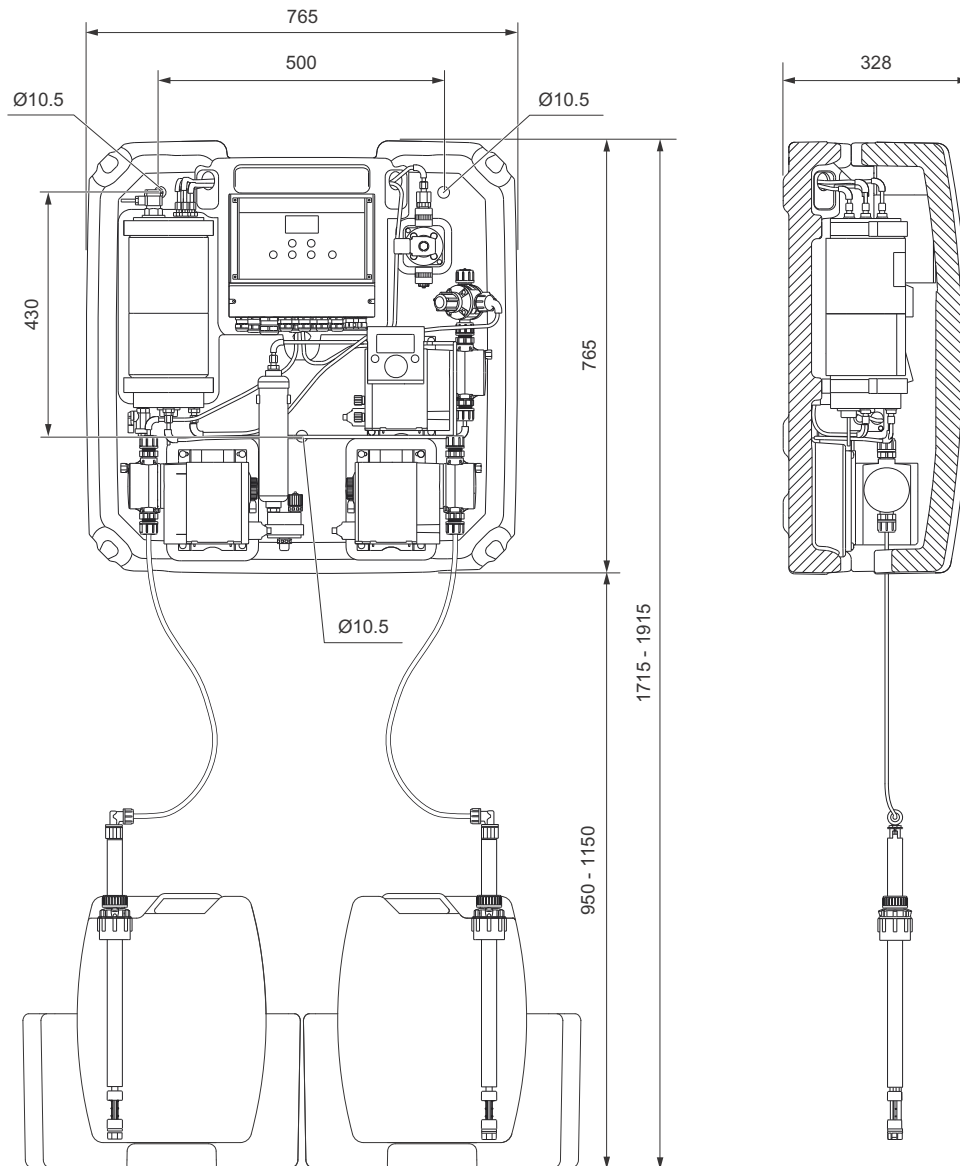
Oxiperm Pro OCD-162-5 and OCD-162-10, with drill holes
